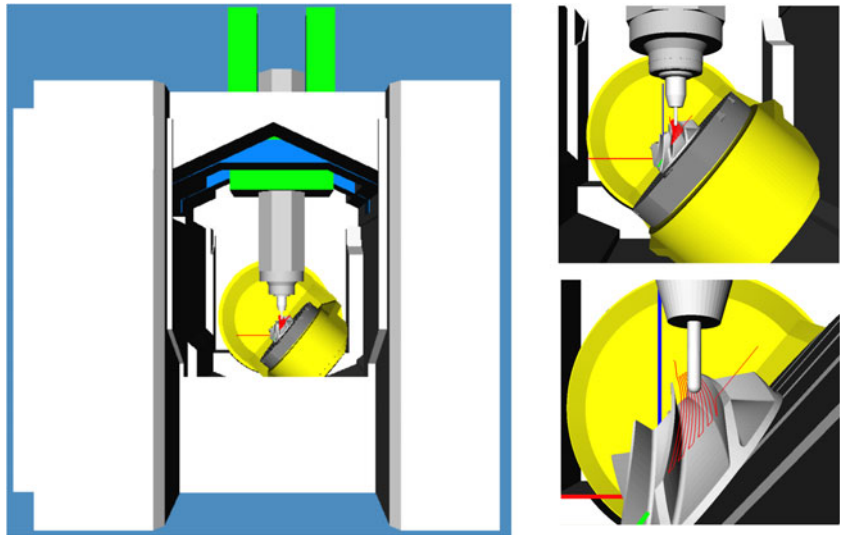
Virtual machine simulation results for BC type table-tilting five-axis machine tool
